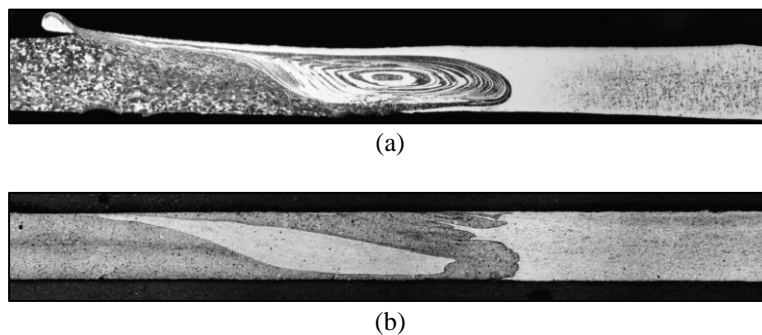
Nugget morphology of dissimilar welds obtained using a concave (a) and a scrolled (b) shoulder (Adapted from Leal, 2011).
